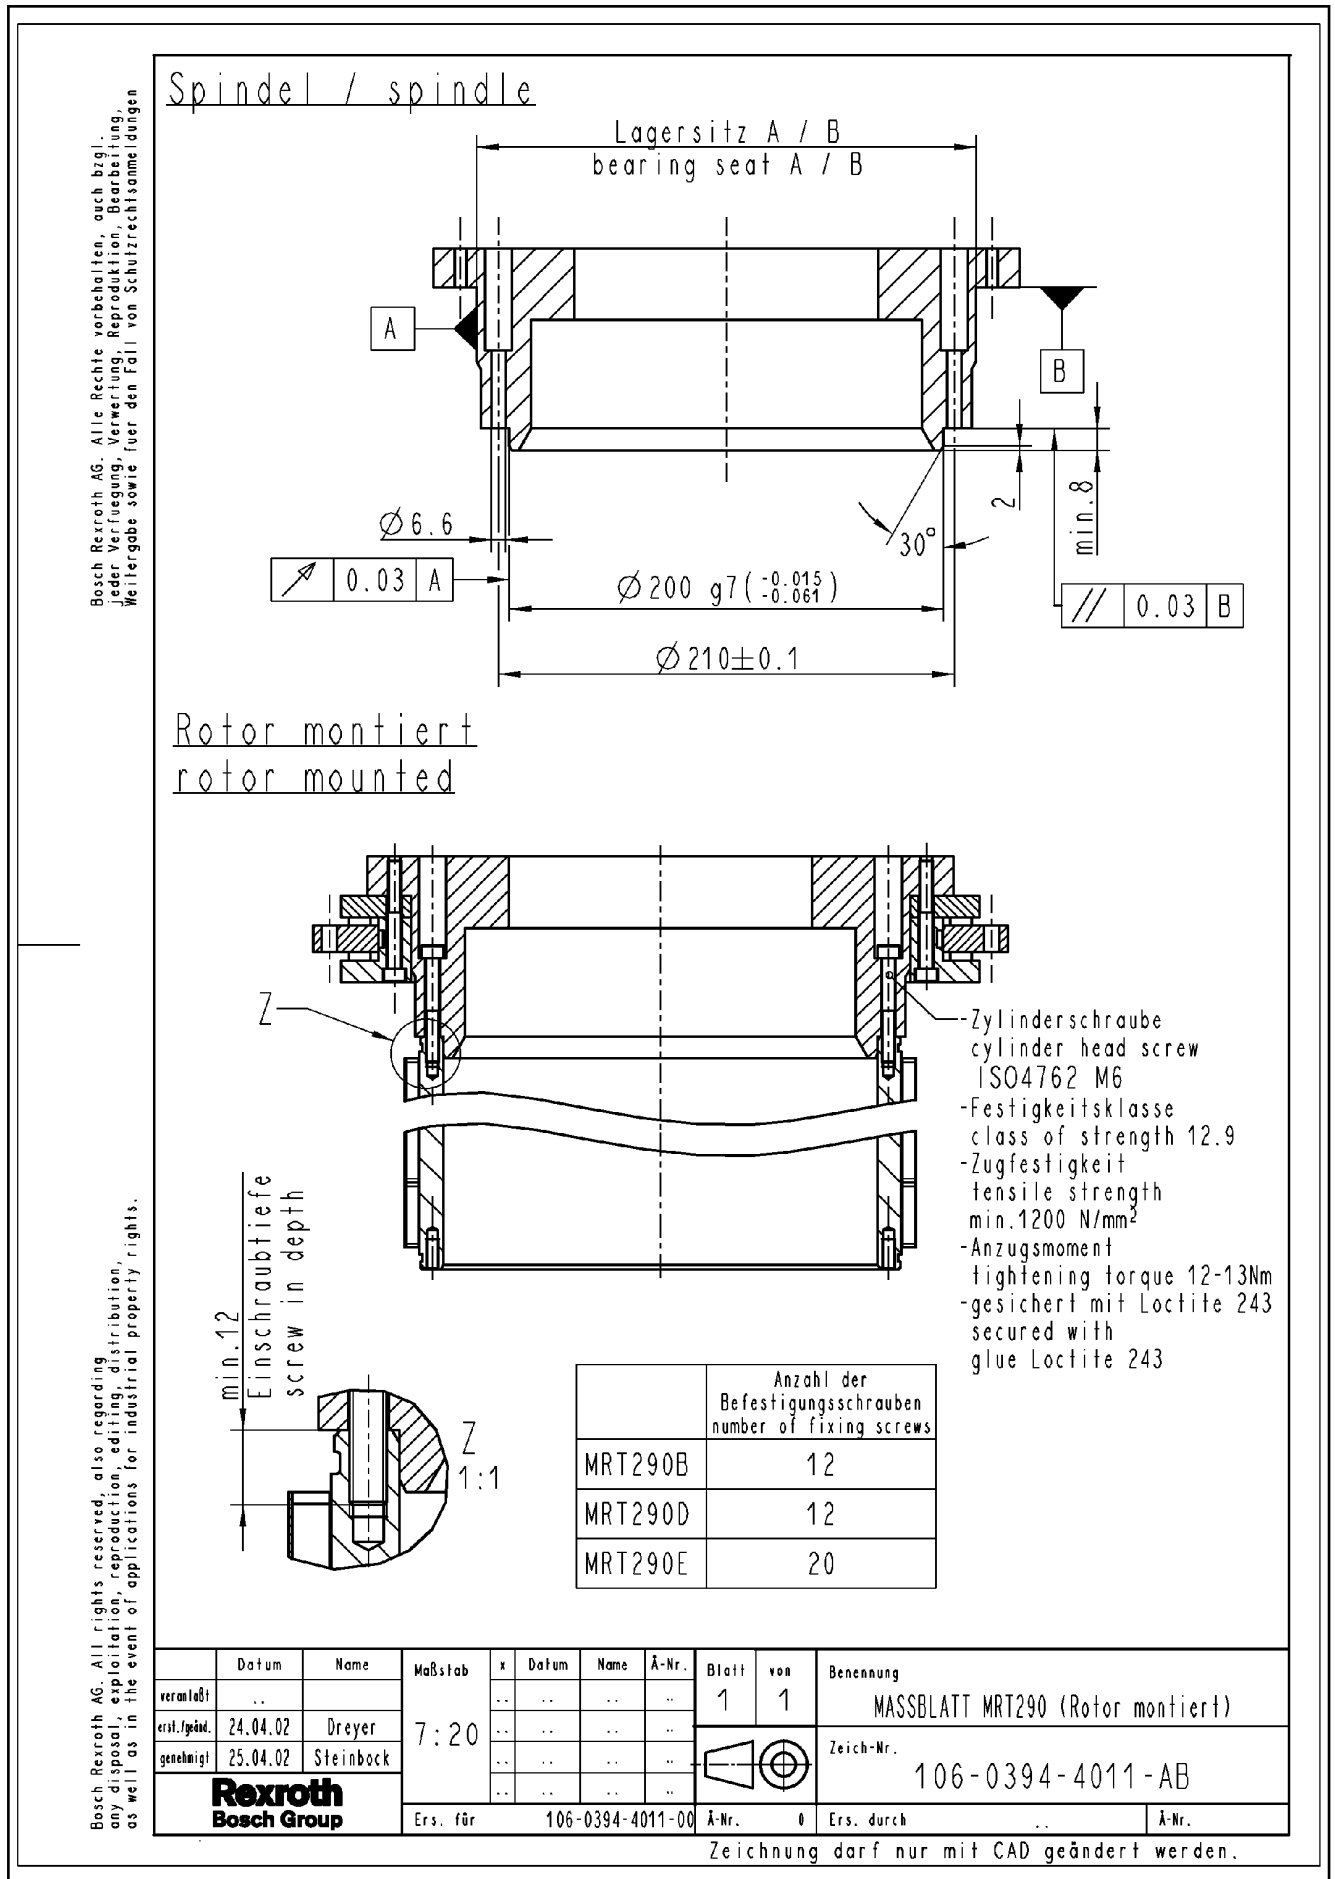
Dimension sheet for rotor MRT290, mounted
